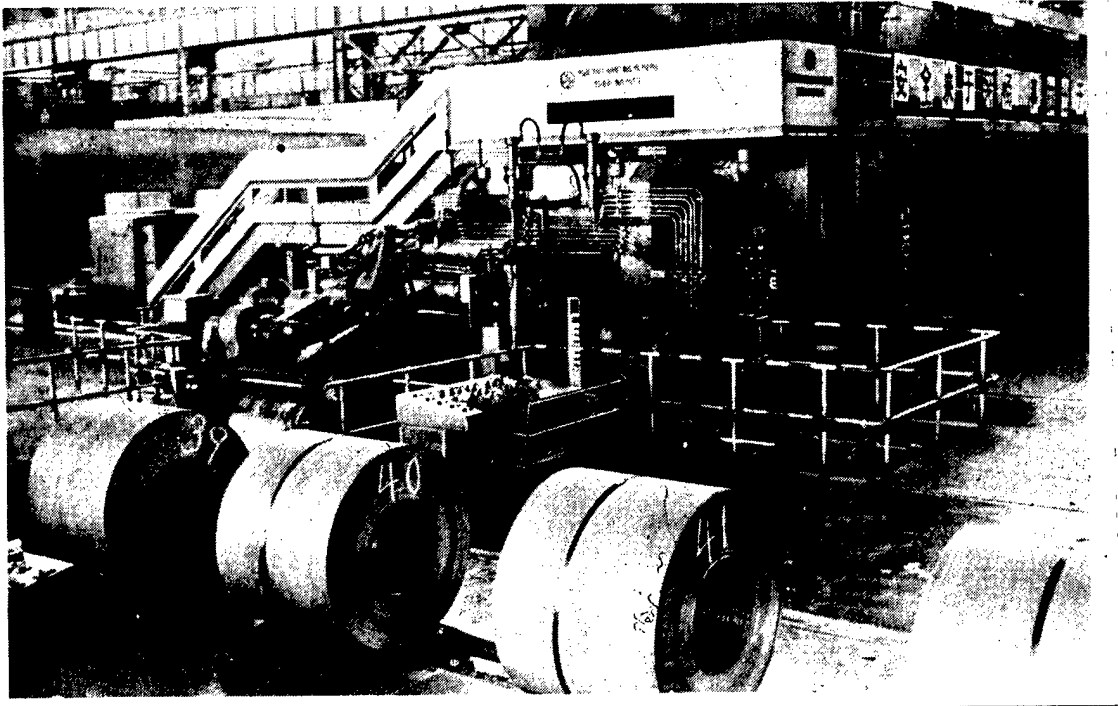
The main rolling machine of Wuhan Iron and Steel Company's sheet steel cold rolling plant is turning out sheet steel. This piece of equipment was imported from West Germany. ✓
